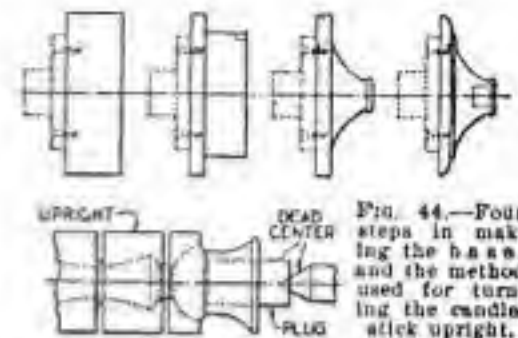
Four steps in making the base and the method used for turning the candlestick upright.
